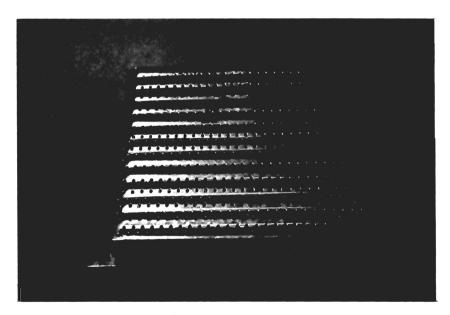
Drying Floor Plank Made From Pre-Pierced Strip
